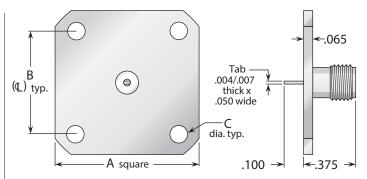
(1" square flange, interchangeable with type N standard flange size)
